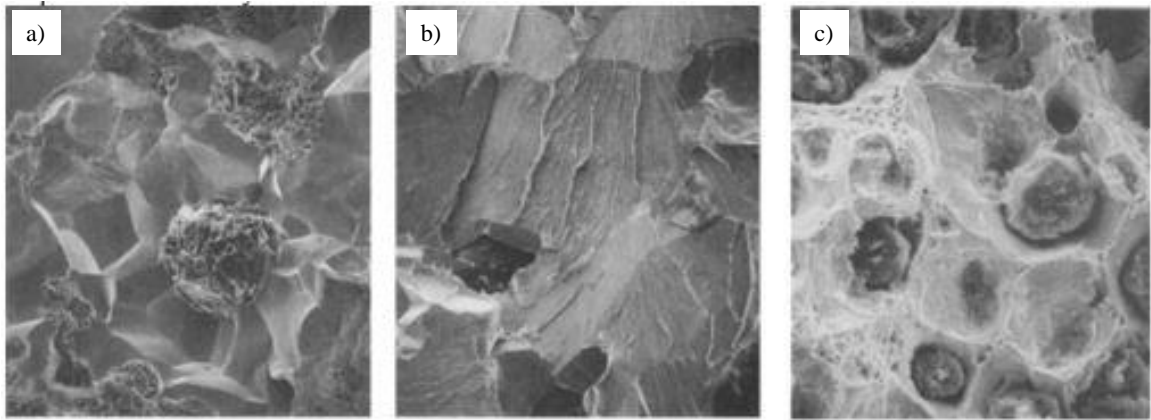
SEM imaged comparing the basic types of overload fracture: (a) intergranular fracture, (b) transgranular fracture by cleavage, (c) ductile fracture with equiaxed dimples [28].
